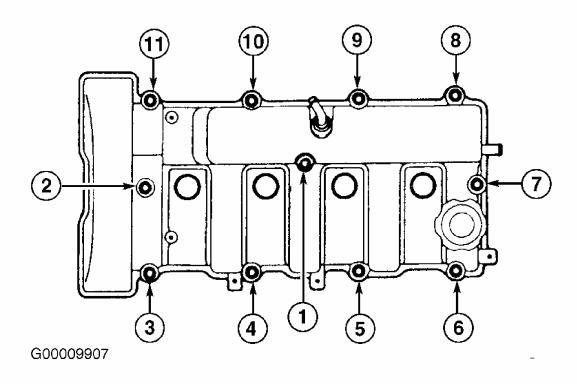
Valve Cover Bolt Loosening Sequence (Protege) Courtesy of MAZDA MOTOR CORP.
